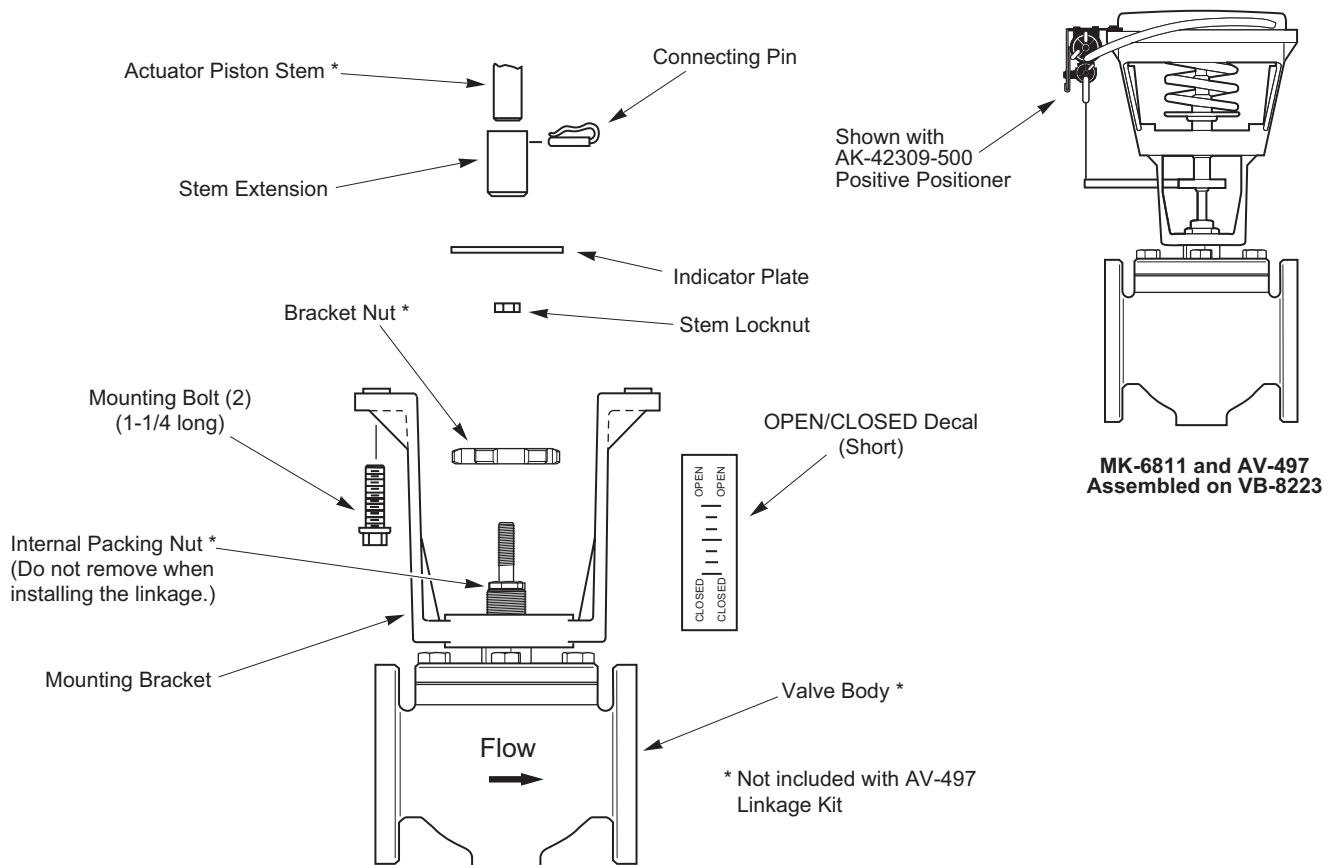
Valve Linkage Assembly for MK-6811 Actuator on 2-1/2" to 5" VB-8223 Valve.
